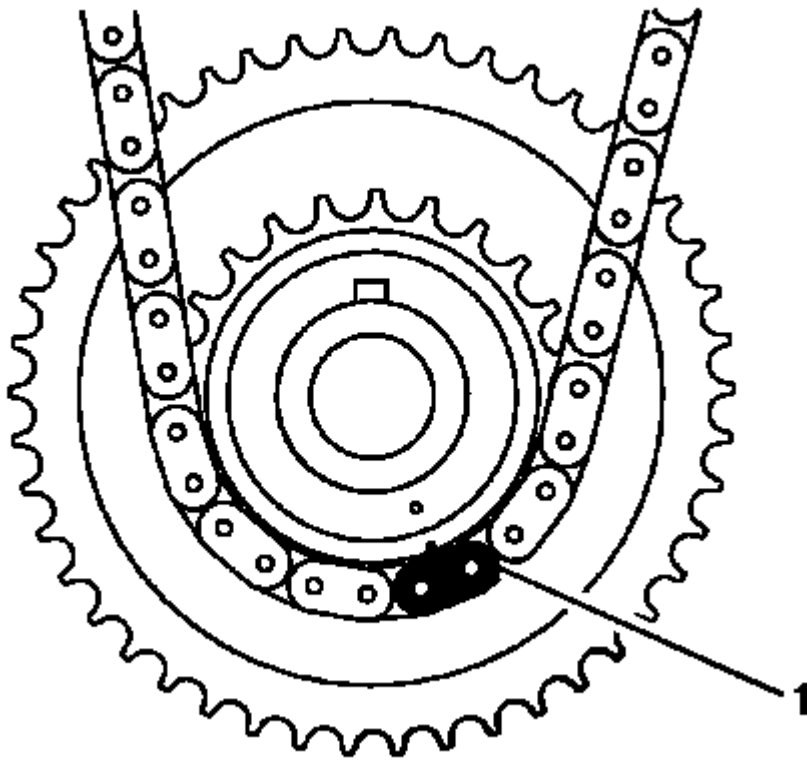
Lining Up First Pink Link With Timing Mark On Crankshaft Sprocket
